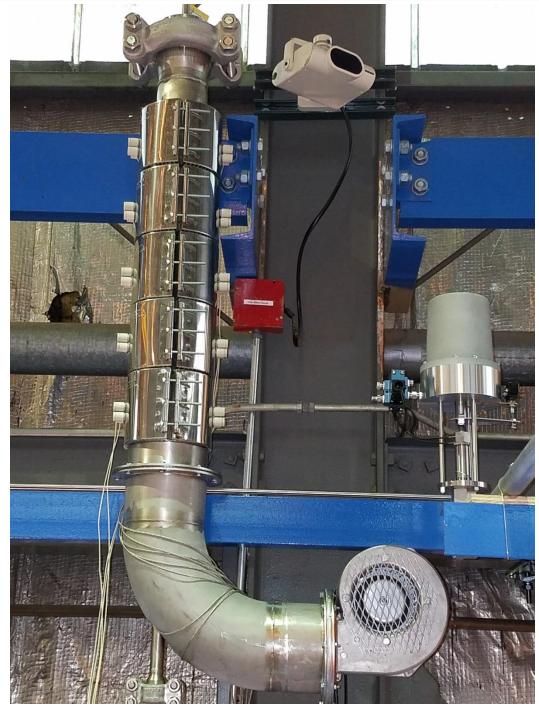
A photo of the completed dump tank vapor trap during an inspection at Meyer Tool & Mfg.
